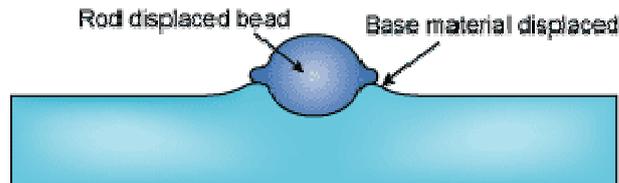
Section through polypropylene weld showing 'side wash'
